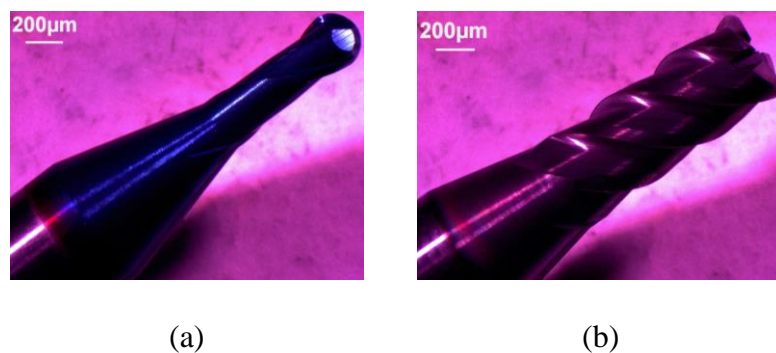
Tools used for a) milling the pocket and b) milling the whole flat surface.
